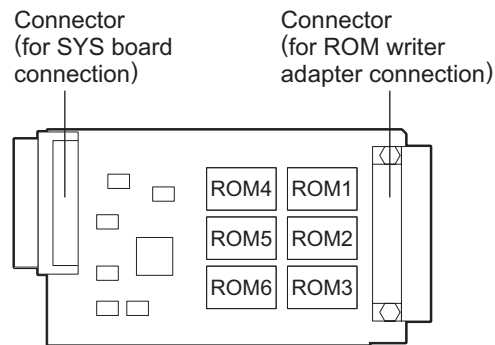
Jig board: PWA-DWNLD-350-JIG2 (48 MB)
